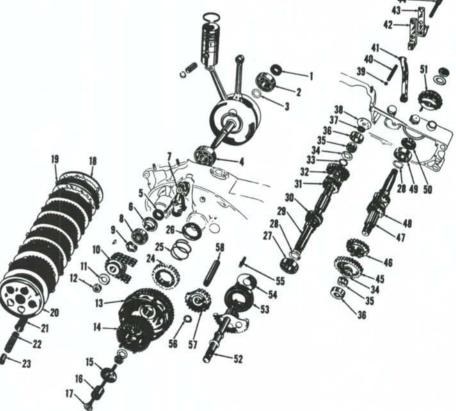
Exploded view of 250cc engine and transmission. Other models are similar. Shift mechanism is shown in Fig. A3-11.
